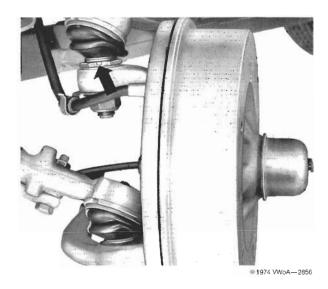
The notch on the eccentric camber adjusting bushing.
